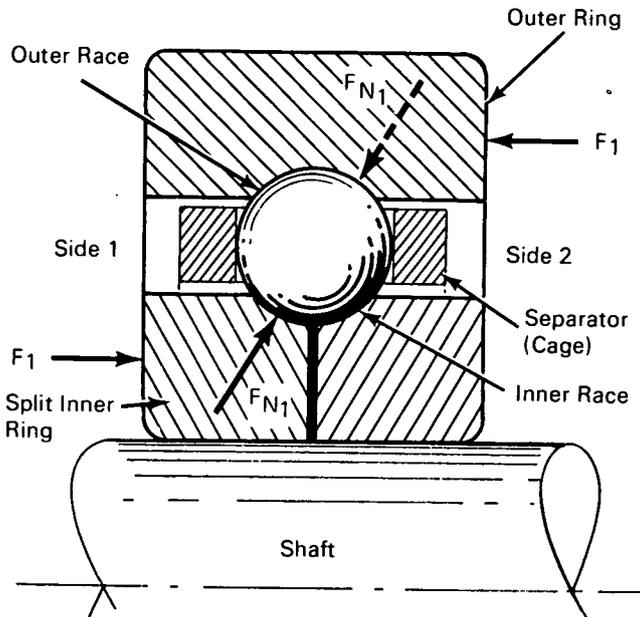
Cross Section Split Inner-Ring Angular-Contact Ball Bearing
